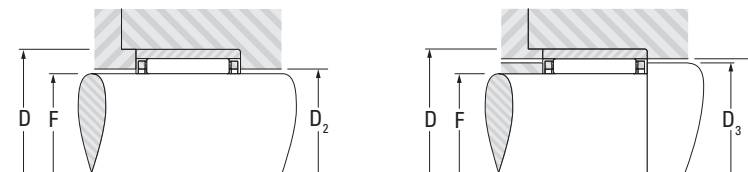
Guidance in the housing (left) and on the shaft (right)
